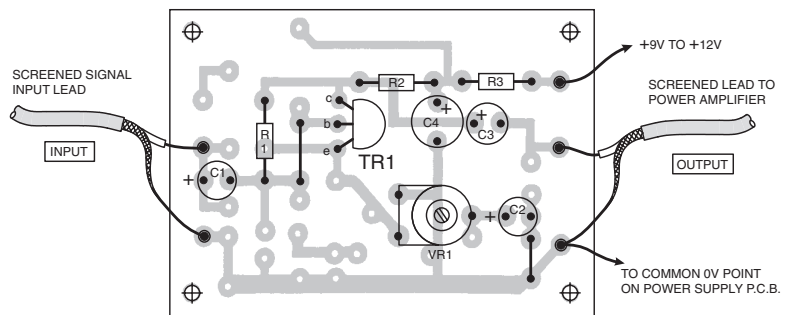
Medium Input Impedance Preamplifier printed circuit board component layout, wiring and full-size copper foil master.
